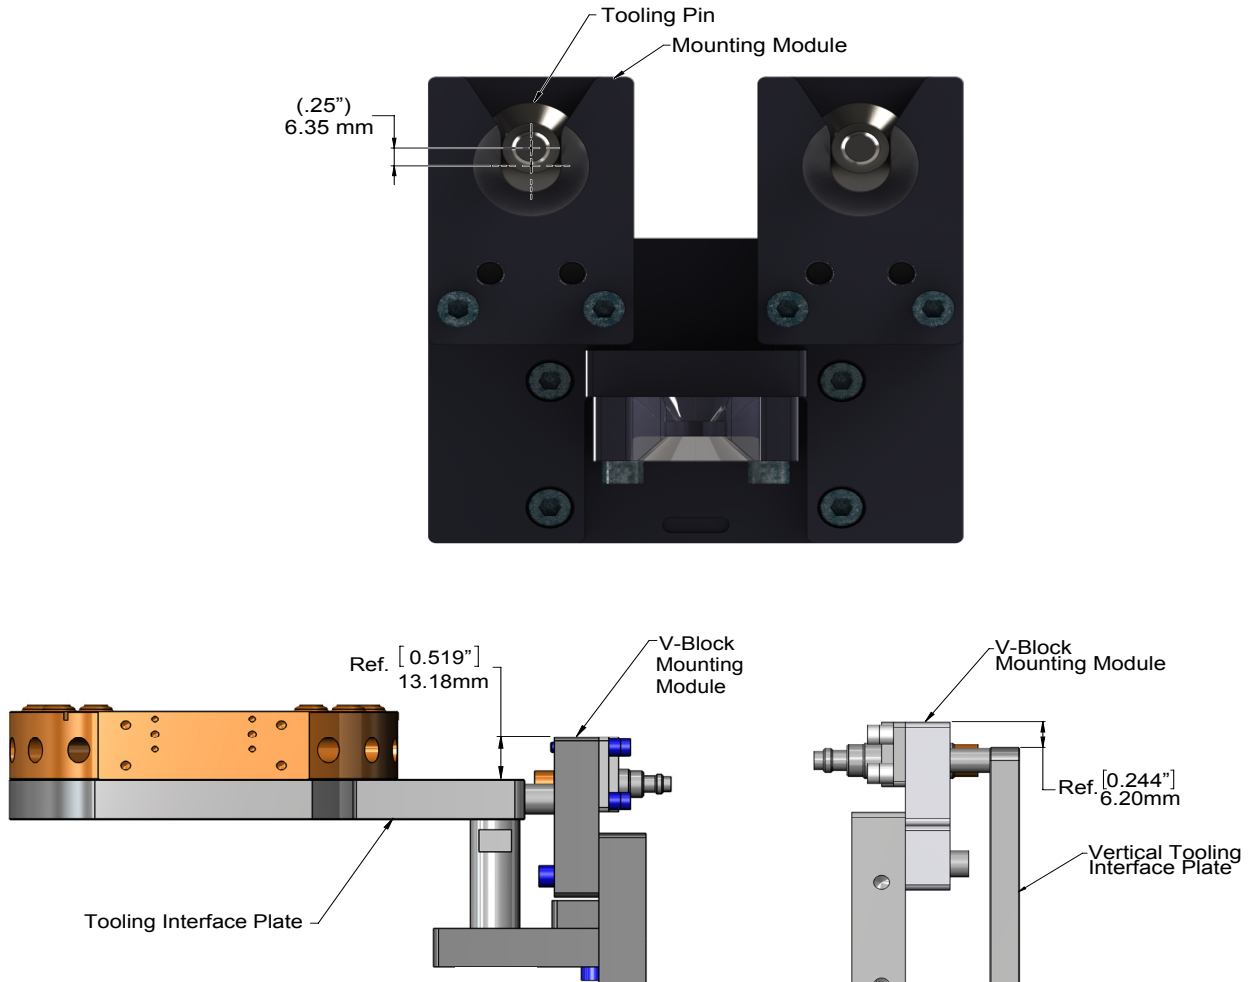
Maximum Clearance for Proper Tool Drop-off for Pin and Bushing Style Mounting
